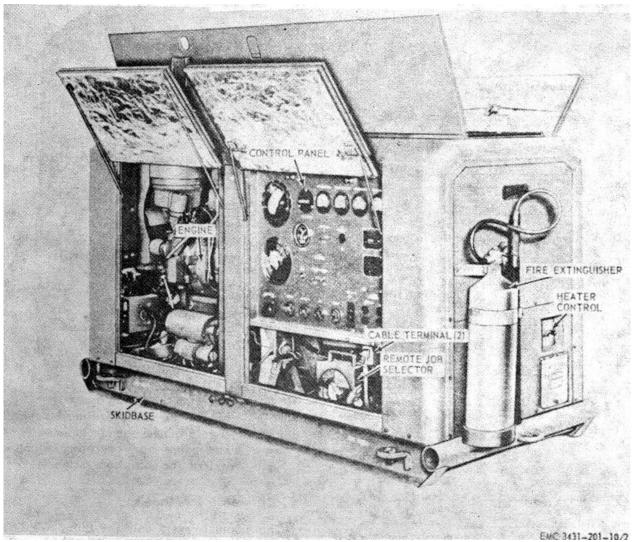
Welding machine, left rear, three-quarter view.
